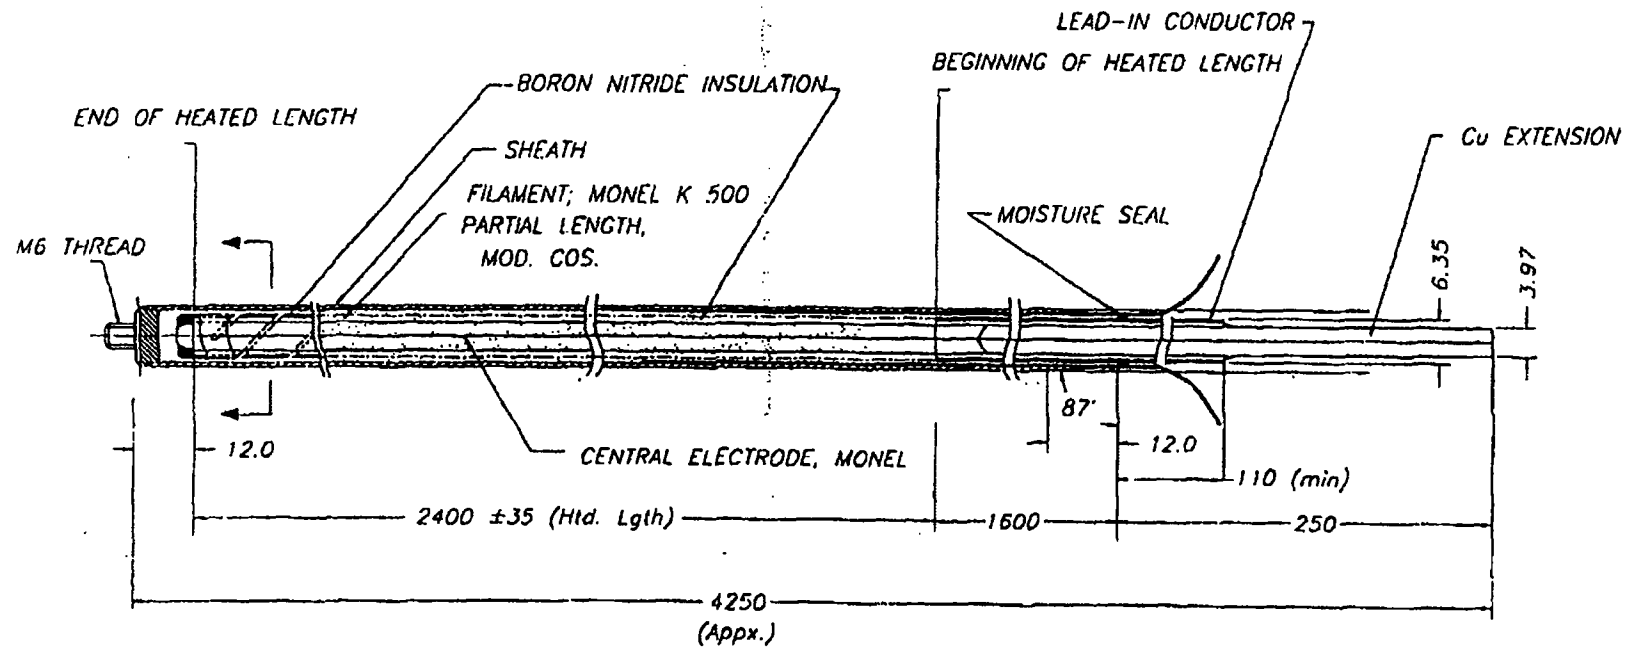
Part-Length Heater Rod Design, Chopped Cosine
